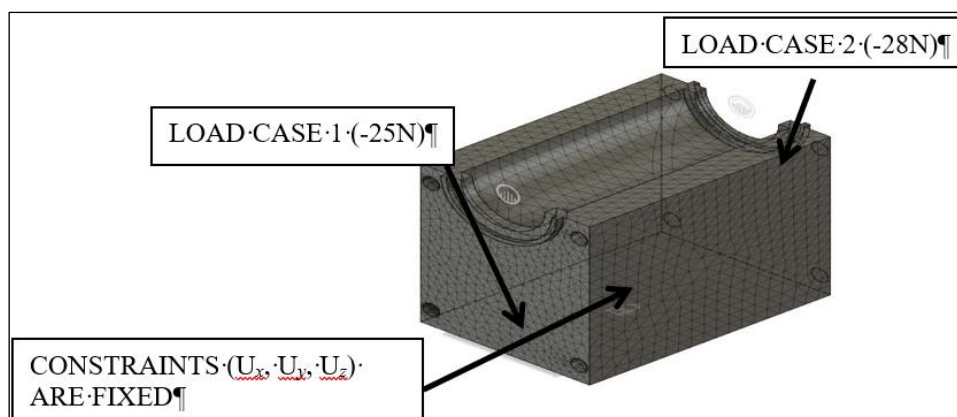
Mesh, constraints and loads of base part of motor support assembly.
